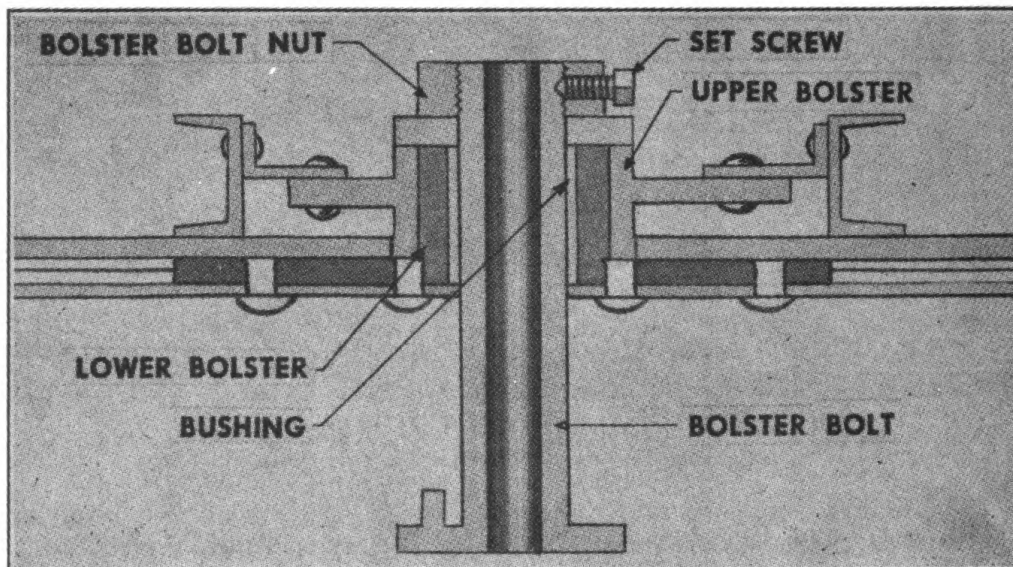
A. CUTAWAY VIEW—BOLSTER
